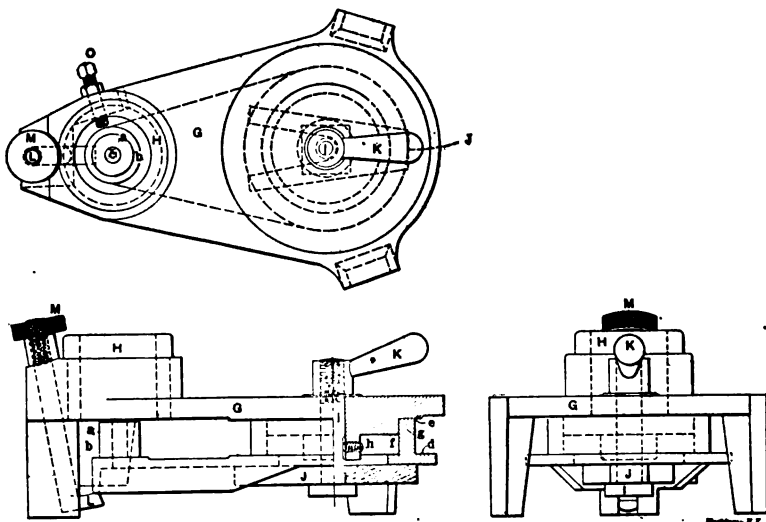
Fixture for Hollow Milling Work shown in Fig. 58.
